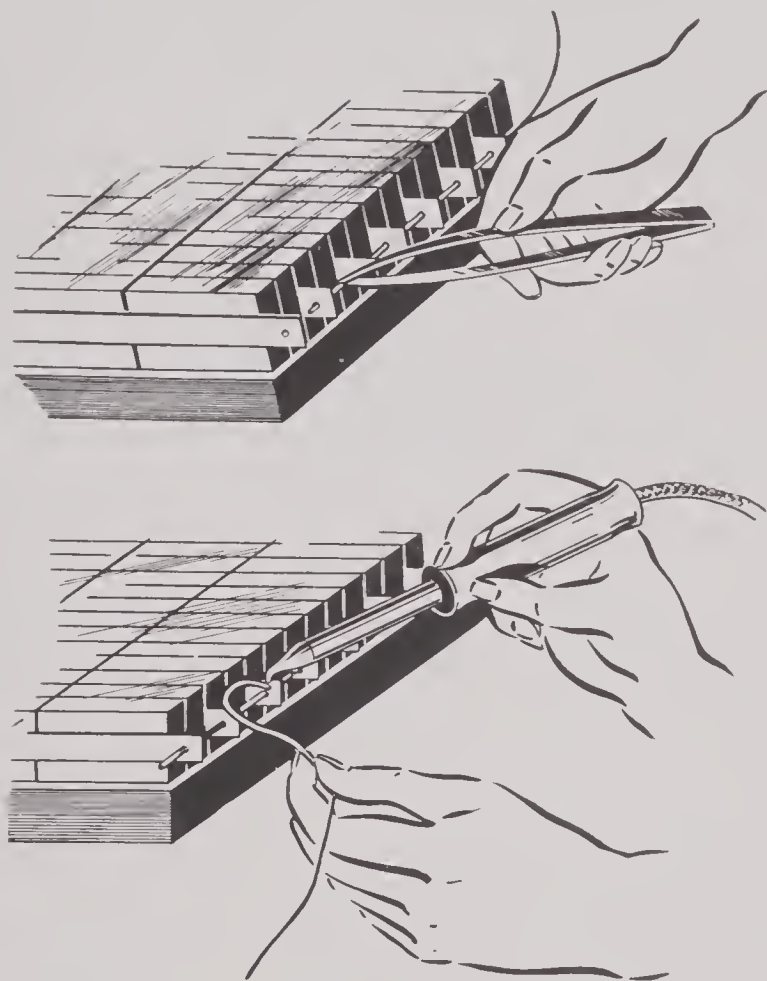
Two stages in the wiring of a crystal array. Above: Threading a wire through holes in the foil strips. Below: Soldering the foils to the wire. A minimum of solder should be used with a minimum of heat in order to avoid fracturing the crystals.
